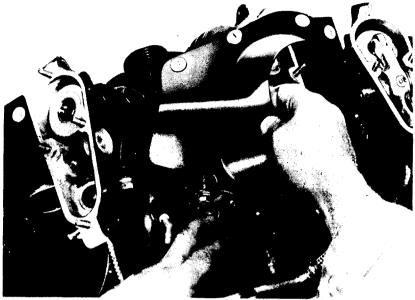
Removing Rocker Box Cover, Rocker Arm, and Push Rod
